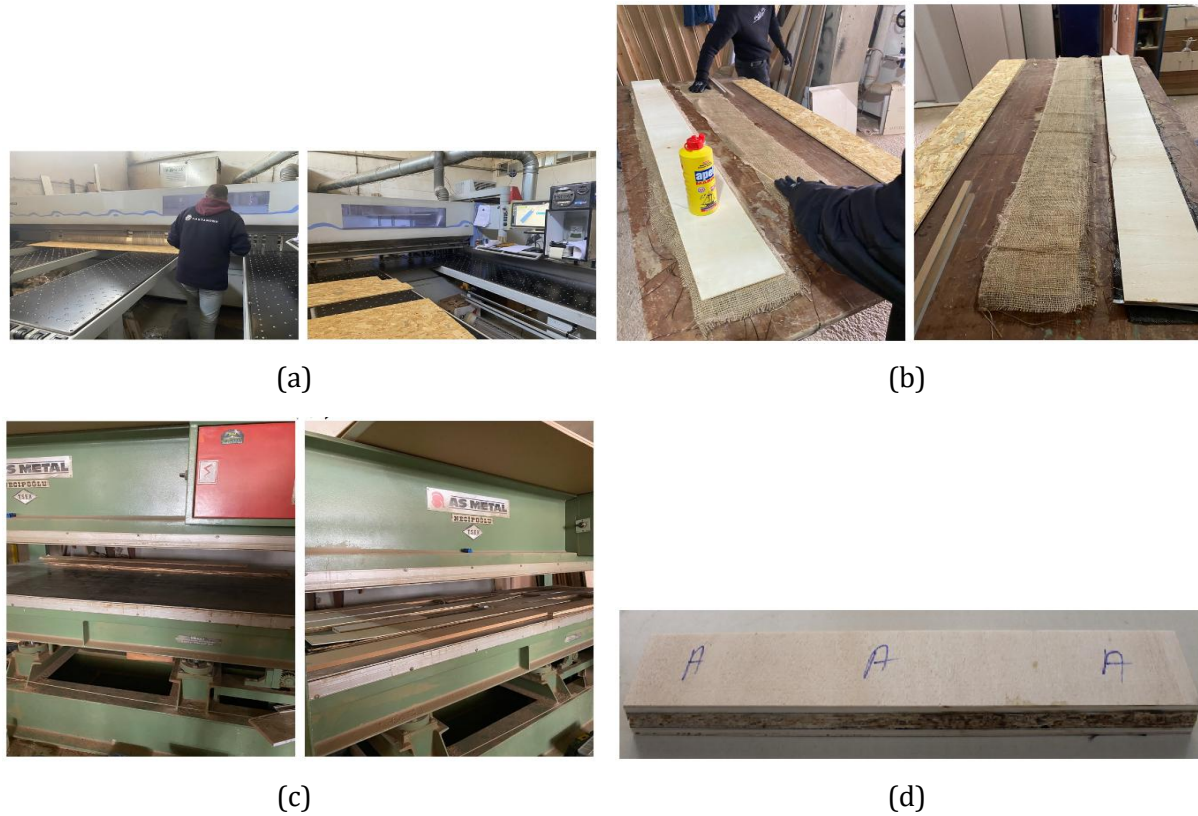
The production process of test samples: (a) using a CNC machine; (b) polyurethane adhesive was used for surface; (c) Hydraulic Veneer SSP-80; ASMETAL; (d) the pressing of samples
